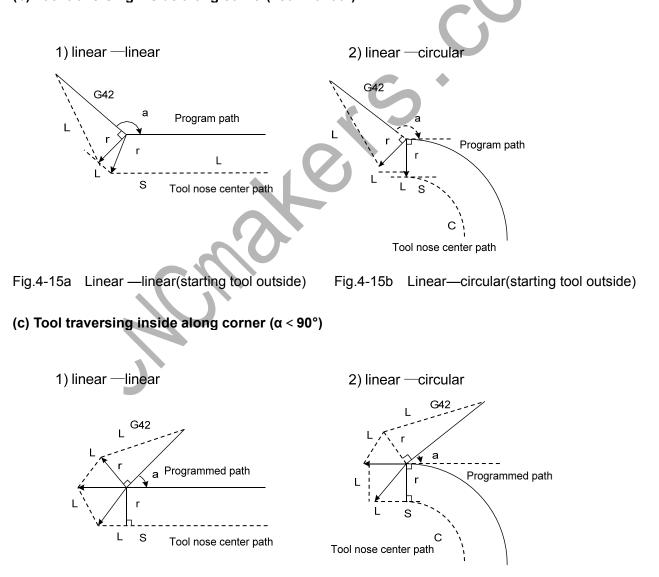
Linear — linear(starting tool outside) Fig. 4-16b Linear — circular (starting tool outside)
